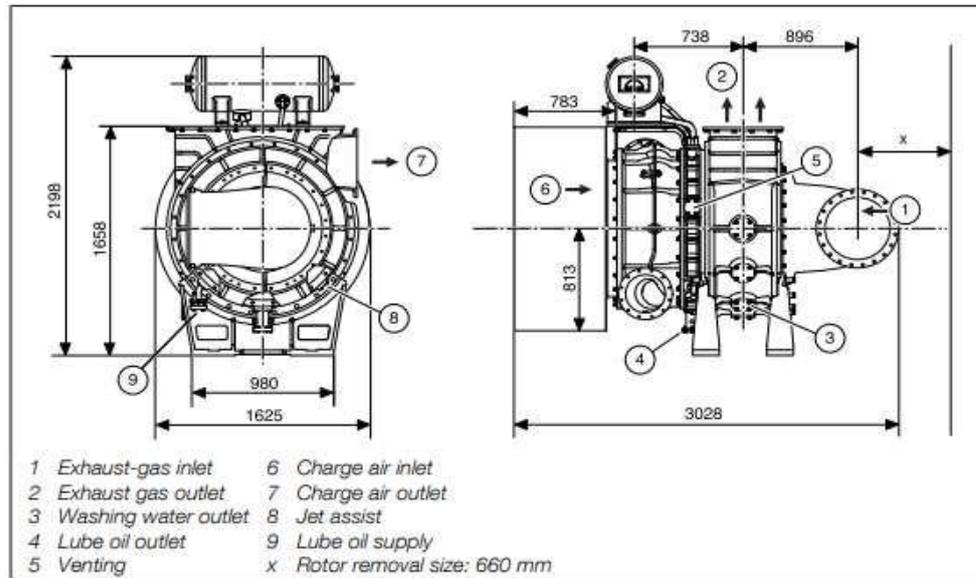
Main dimensions, TCA66 with 90° gas-admission casing
